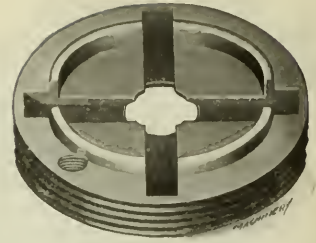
Fuse Base which is milled in Machine shown in Fig. 1
